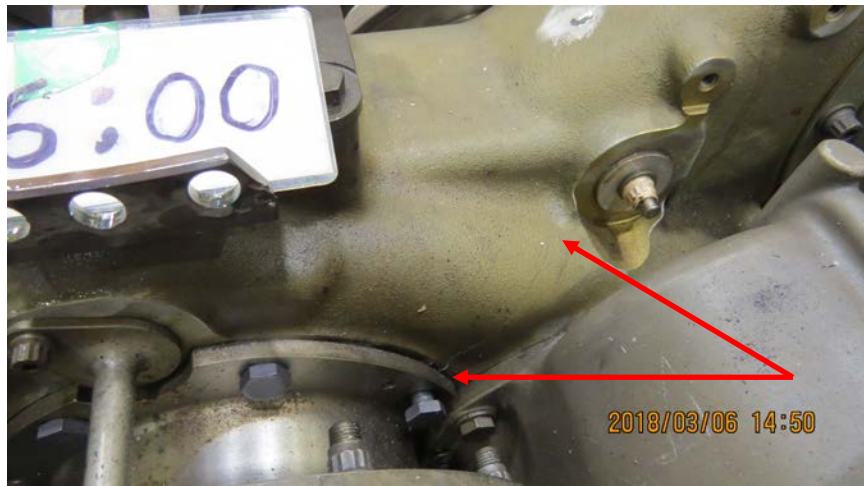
Close up showing crack on front of gearbox from lay shaft drive pad. (P&W)
